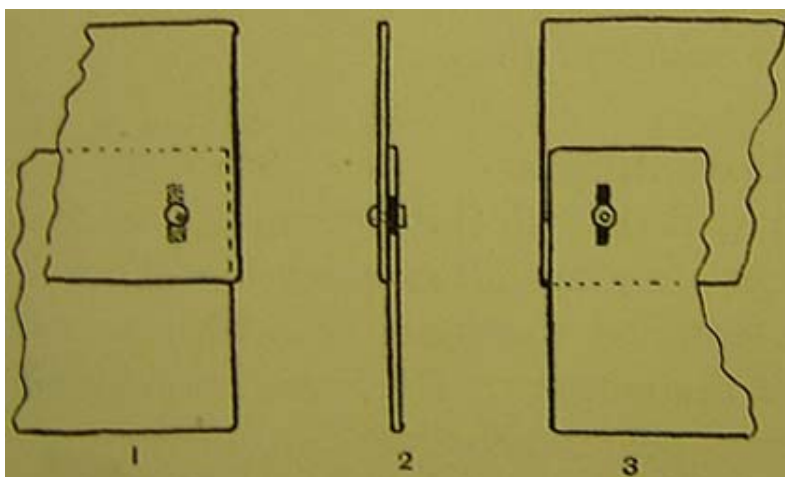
Sliding rivet - 1) Front; 2) Side; 3) Back
